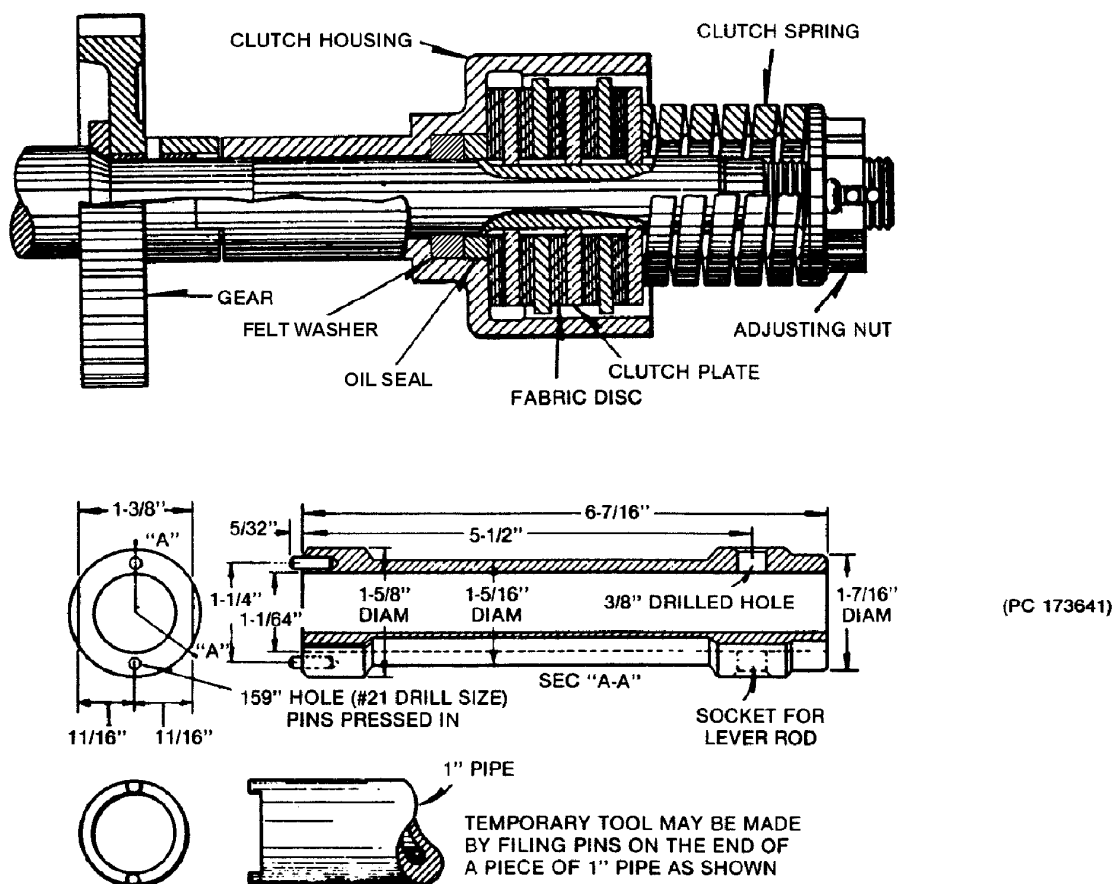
Friction Clutch Assembly and Special Wrench for Packing Gland Nut
